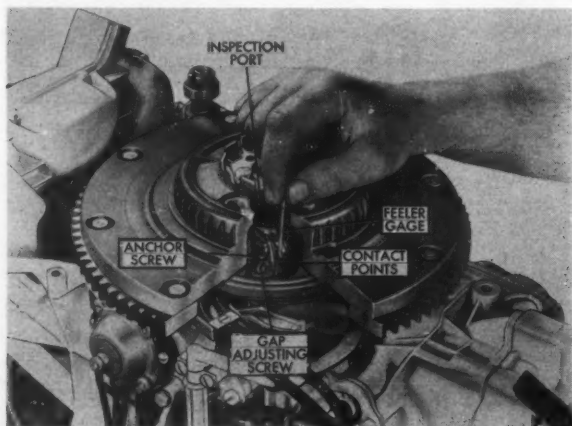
Adjusting the gap in the magneto breaker points on an outboard motor.
